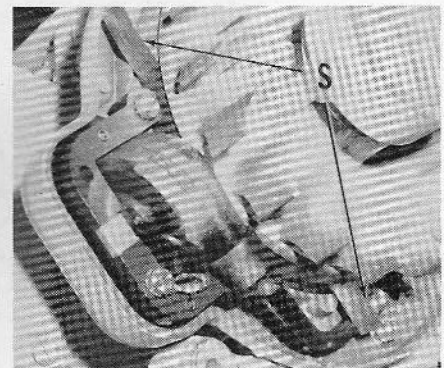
View showing method of checking air gap using shim stock (S).
